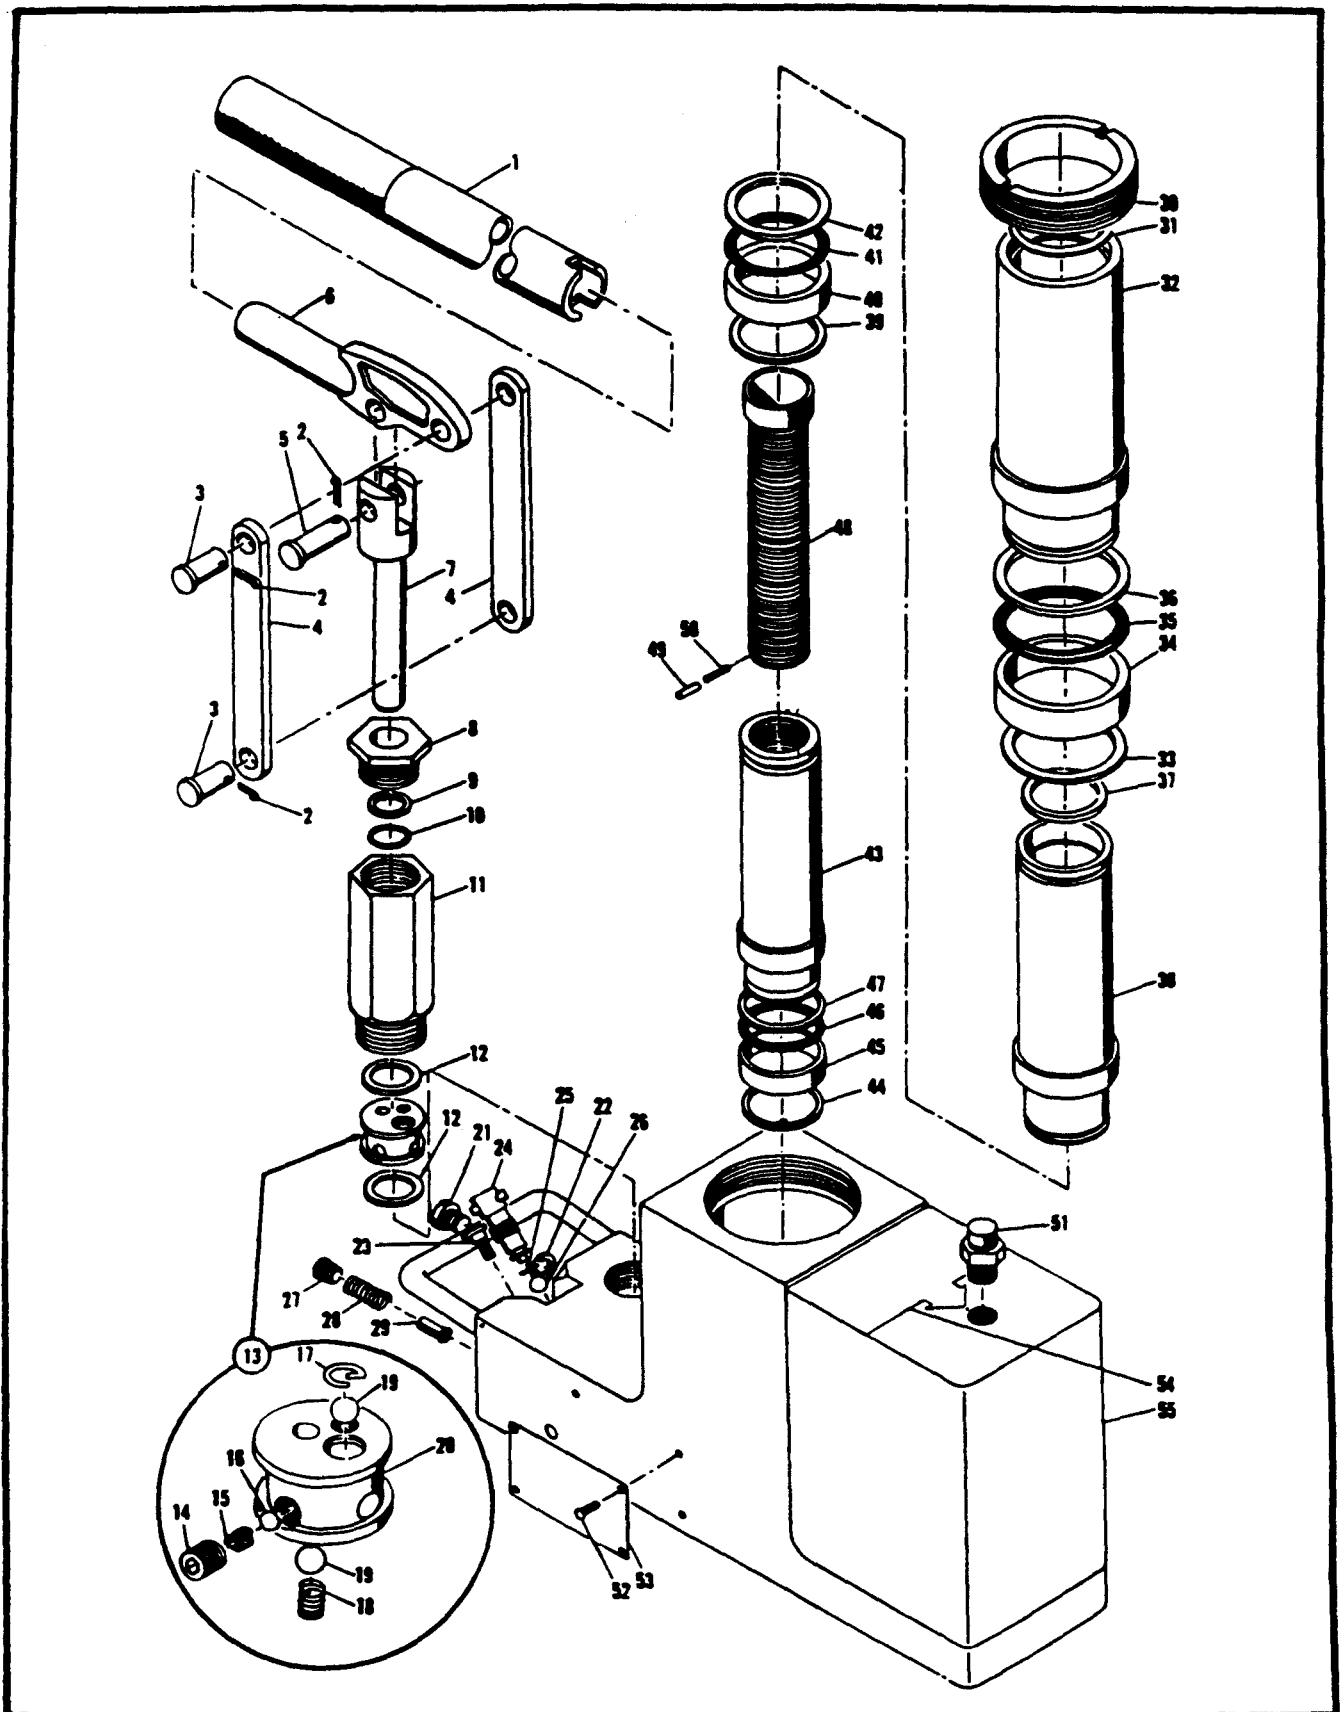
5-Ton Hydraulic Aircraft Hand Jack Assembly, Type A-5, Part No. 53D22020
